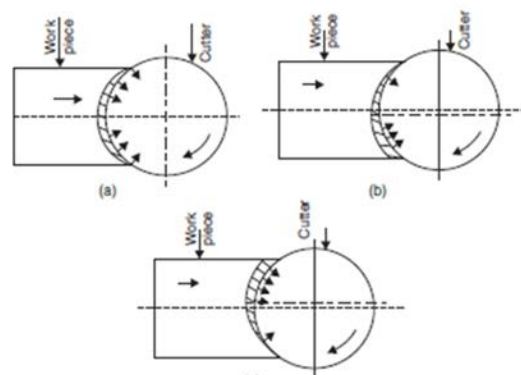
Illustrates Combining down-cut and upcut milling operations is known as face milling.
